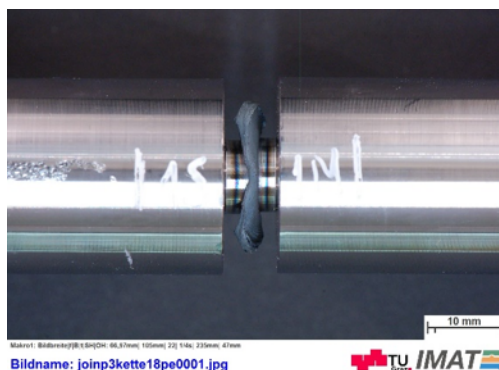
Appearance of a welded small cross-section sample.
